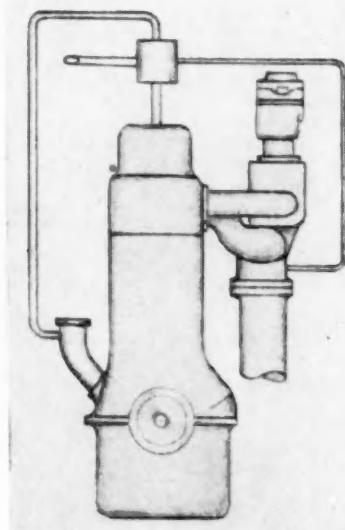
(left) - "Eductor" type crankcase ventilator proved successful in reducing cold sludge deposits in the crankcase and valve covers
